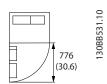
Space in front of IP21/IP54 enclosure type, frame size F8
